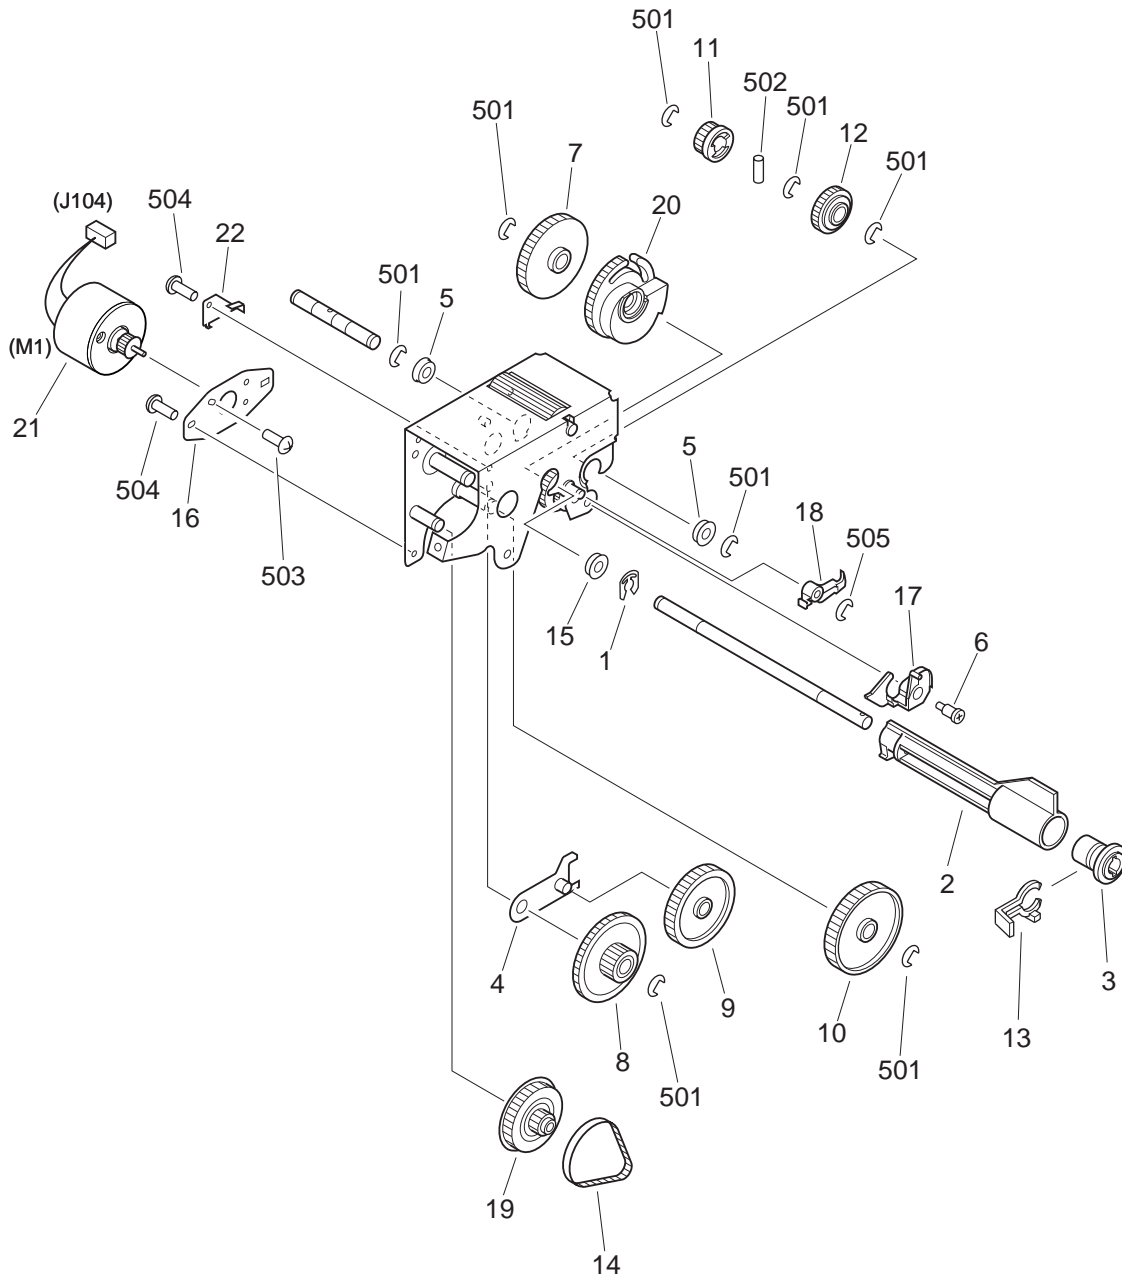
FEEDER DRIVE ASSEMBLY
